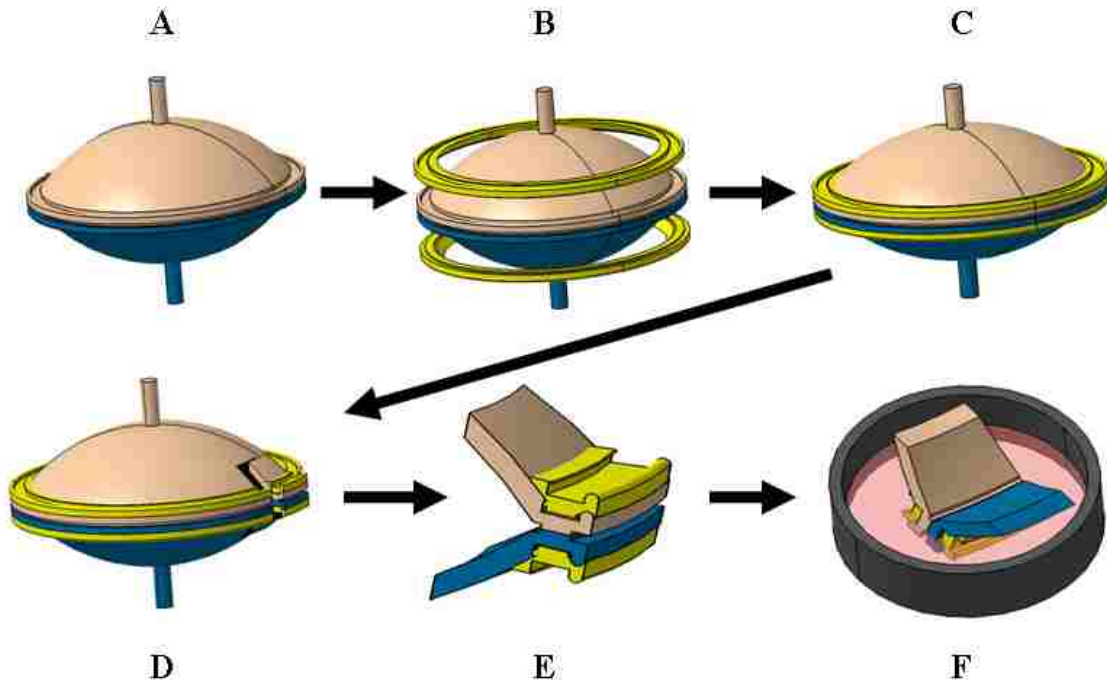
Steps for assembly of stacked specimen. A- Welded sample. B- Two flanges cut from an un-welded hemisphere (preassembly). C- Un-welded flanges glued to welded hemisphere. D- Stacked specimen for each insert is cut out. E- Stacked specimen for one insert. F- Stacked specimen is mounted in a PVC pipe using epoxy.
